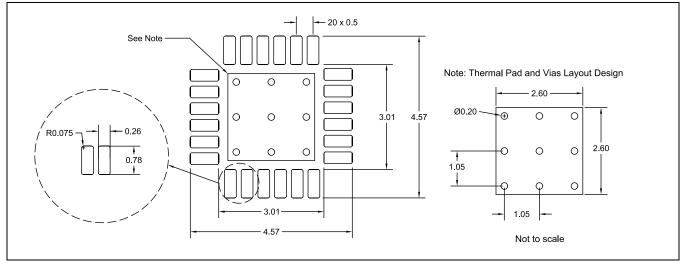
QFN 24L 4.0mm × 4.0mm soldering footprint (NOT TO SCALE)
